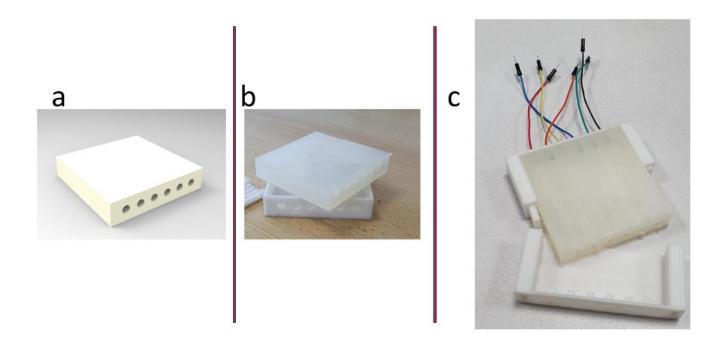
Soft Skin Design and Fabrication. The ImpEdded skin simulation as in (A) and the mold casting is shown in (B). the assembly of the wires and the casing is shown in (C), the skin strap is filled with the mixture then tested.
